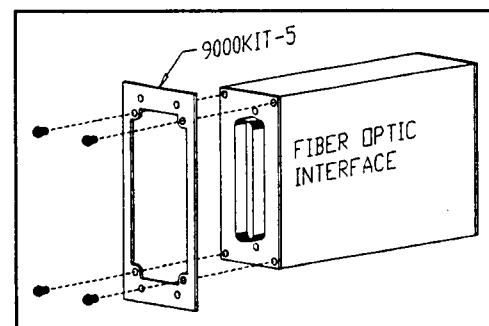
SYSTEM 9000 CHASSIS MOUNT
